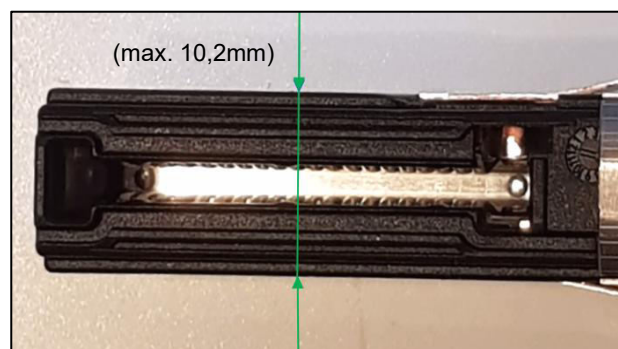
Fault-free assembly with defined outer dimension
